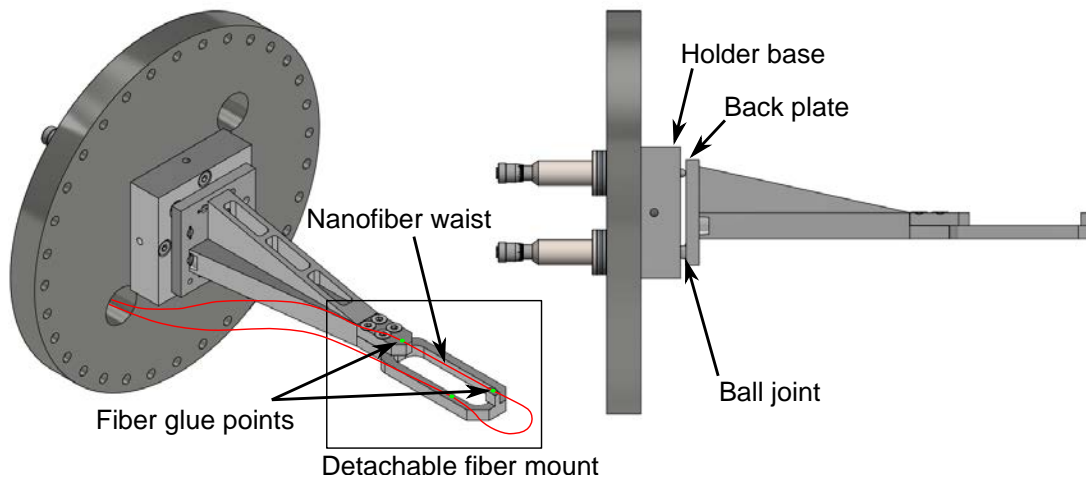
Assembly of the translateable fiber mount: Mechanical vacuum feedthroughs push onto the fiber mount back plate which in turn is pulled onto the holder base via springs. The arm can move about a ball joint between holder base and back plate, allowing to tilt the fiber holder in two directions similar to a mirror mount. The fiber mount can be unscrewed from the arm to be placed inside the fiber pulling rig where the pulled fiber is glued onto it after fiber pulling (green marks).
